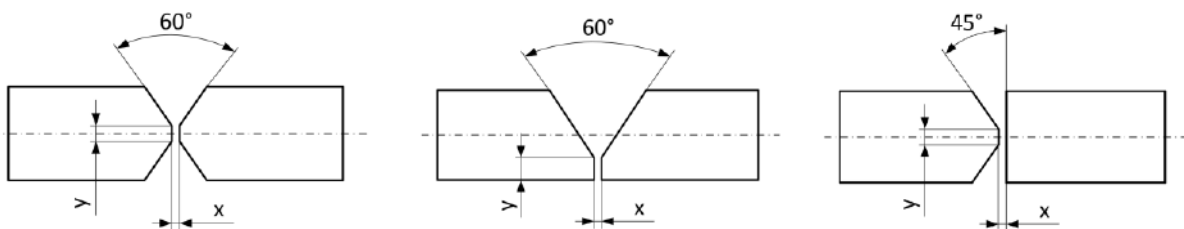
Butt joints welded by welding processes 111, 114, 135 and 136
